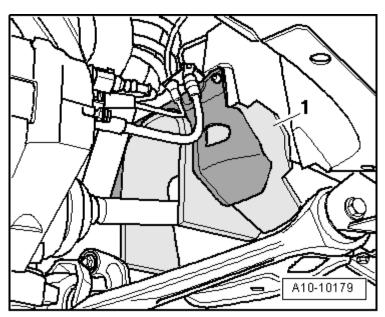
Remove Right Drive Axle Cover Courtesy of AUDI OF AMERICA, LLC
